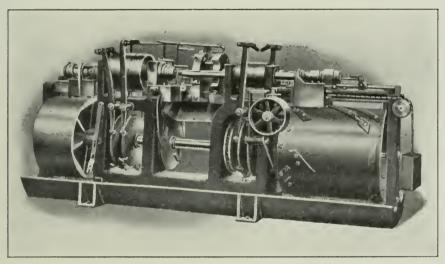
Spencer Double-Turret Automatic Screw Machine
